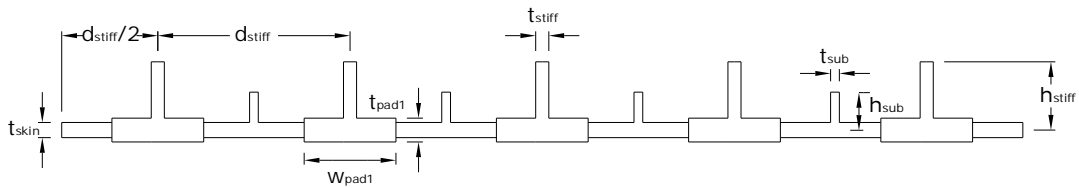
Straight stiffened plate with substiffeners and pads under stiffeners
